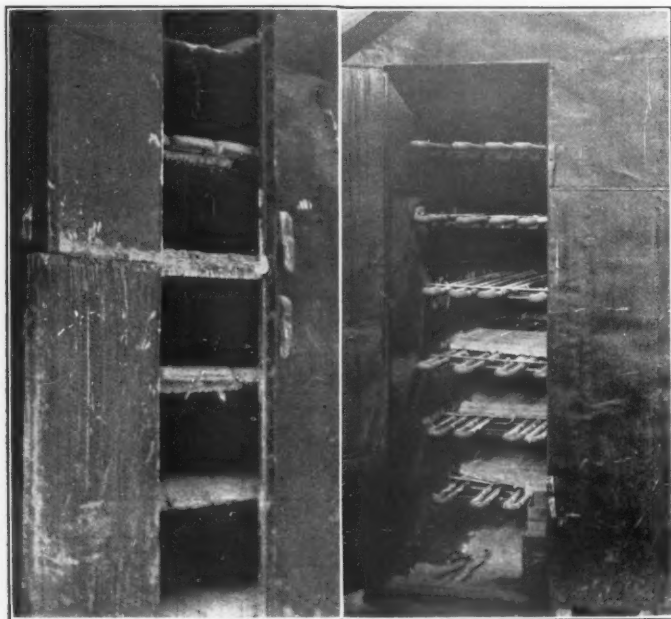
Arrangement of Doors on the Inner Wall of the Oven
